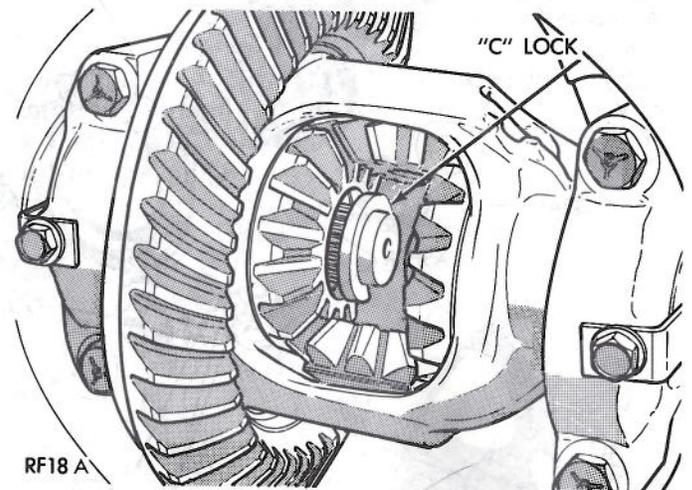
Removal or Installation of Axle Shaft "C" Locks
